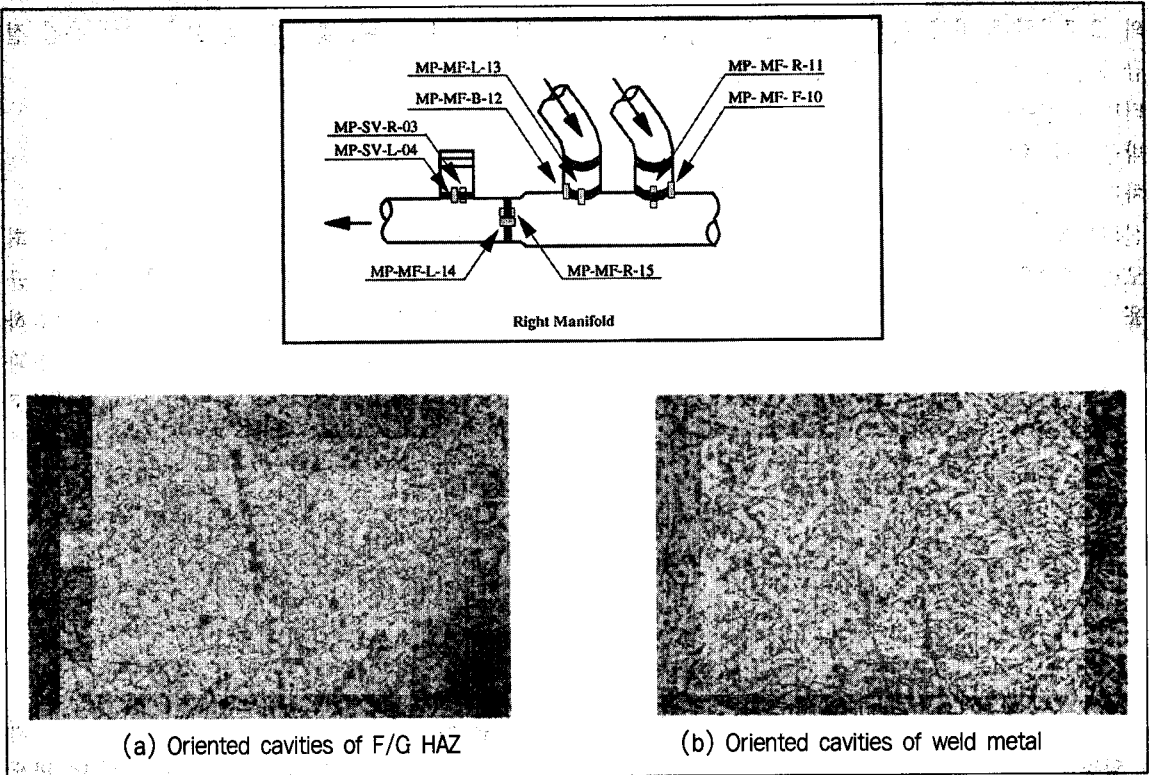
Manifold welds of main steam piping of YS #2 boiler
